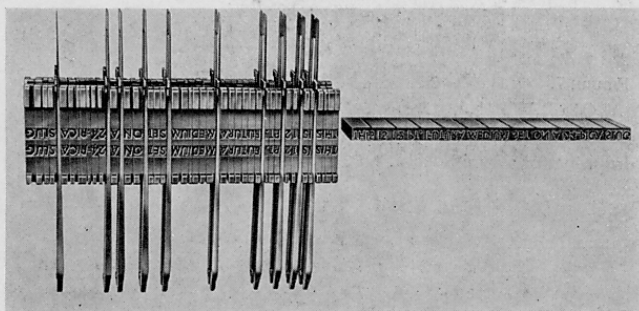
Assembled Line Ready for Casting and the Cast Slug.
